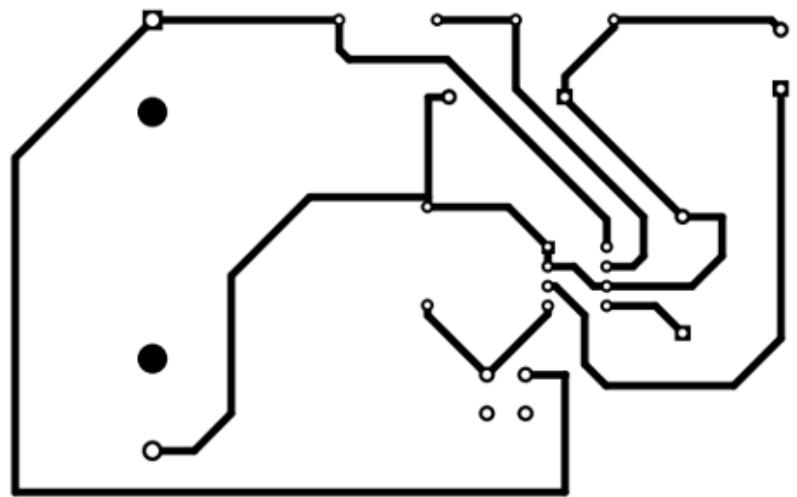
PCB Design of Buzzer Alarm Circuit
